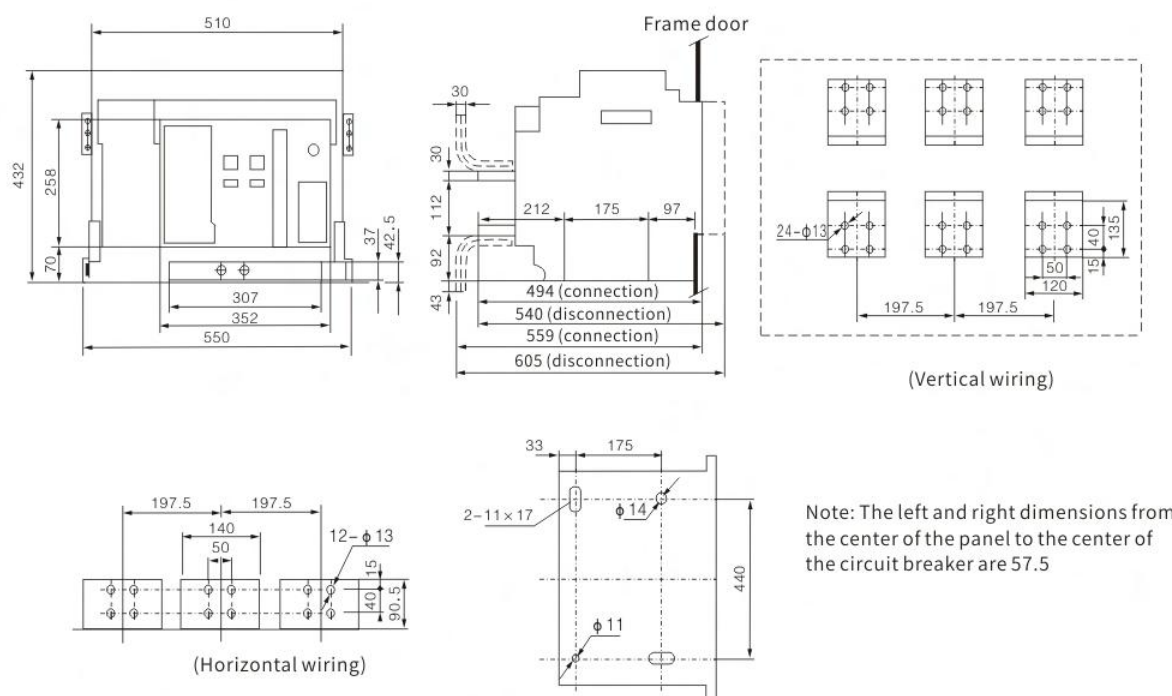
Outline and installation dimension of the draw-out type circuit breaker (JUV1 -4000/3)
